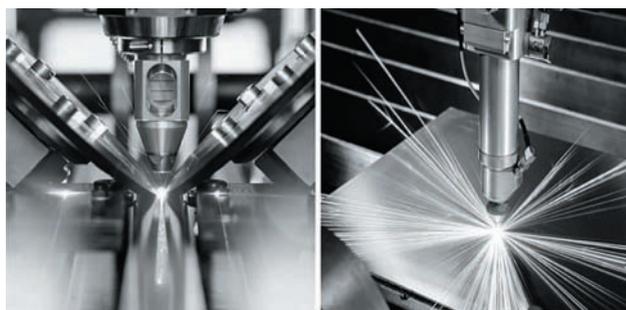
Laser welding of the steel pipe's ends (left) and laser cutting of steel sheet (right)
